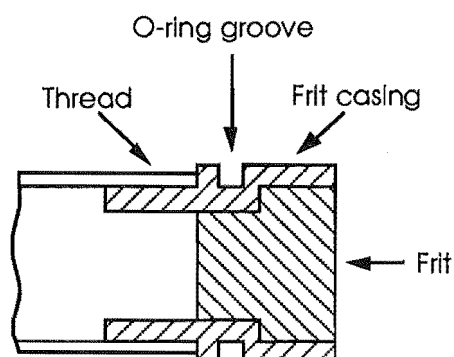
Sectional view of the frit and the casing into which it was welded.
